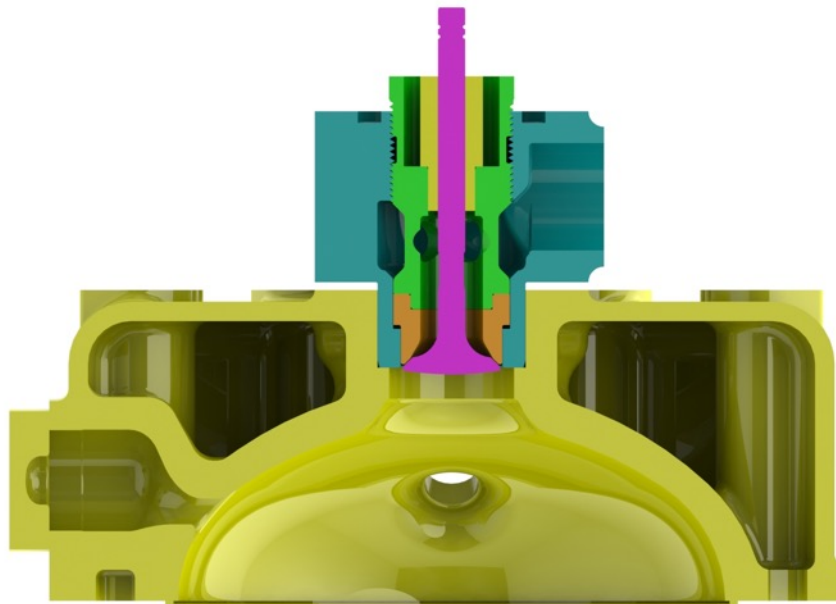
The total assembly of the DI geometry and full cylinder head prior to surface extraction. Note the air start cavity to the far left of the cylinder head and the dimple into the page for the spark plug.
